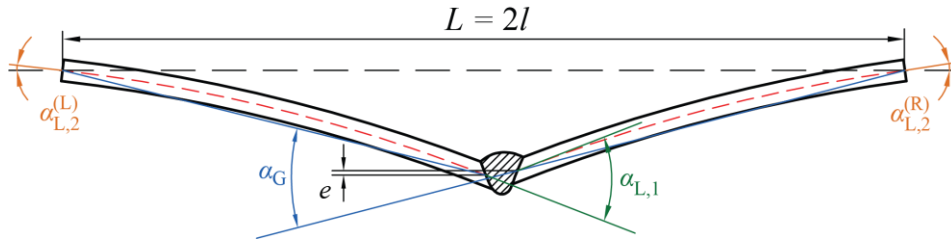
Angular distortion definitions for butt-welded thin plate specimens [49].
